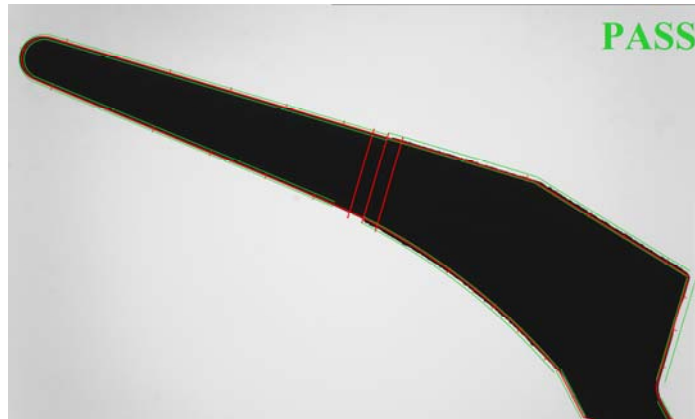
Without VisionGauge®'s enhanced CAD Auto-Align™ tool, larger parts such as this 6" hip stem needed to be worked on in a single – lower magnification / lower resolution – field-of-view. This necessarily produced lower resolution and accuracy.
